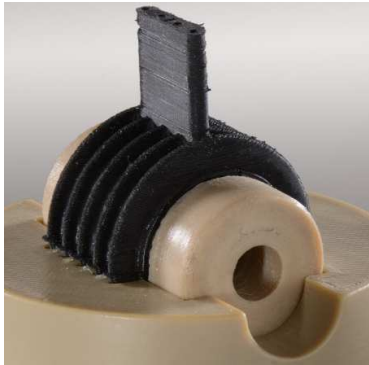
Annealed PEEK mold and vulcanized rubber component on the mold core
